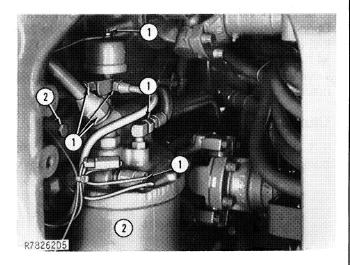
Clutch Oil Filter Housing - (Late Model)
